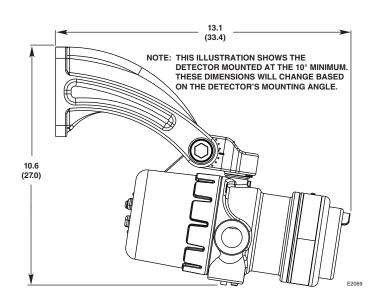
Q9033 Mounting Bracket Dimensions in Inches (cm)
